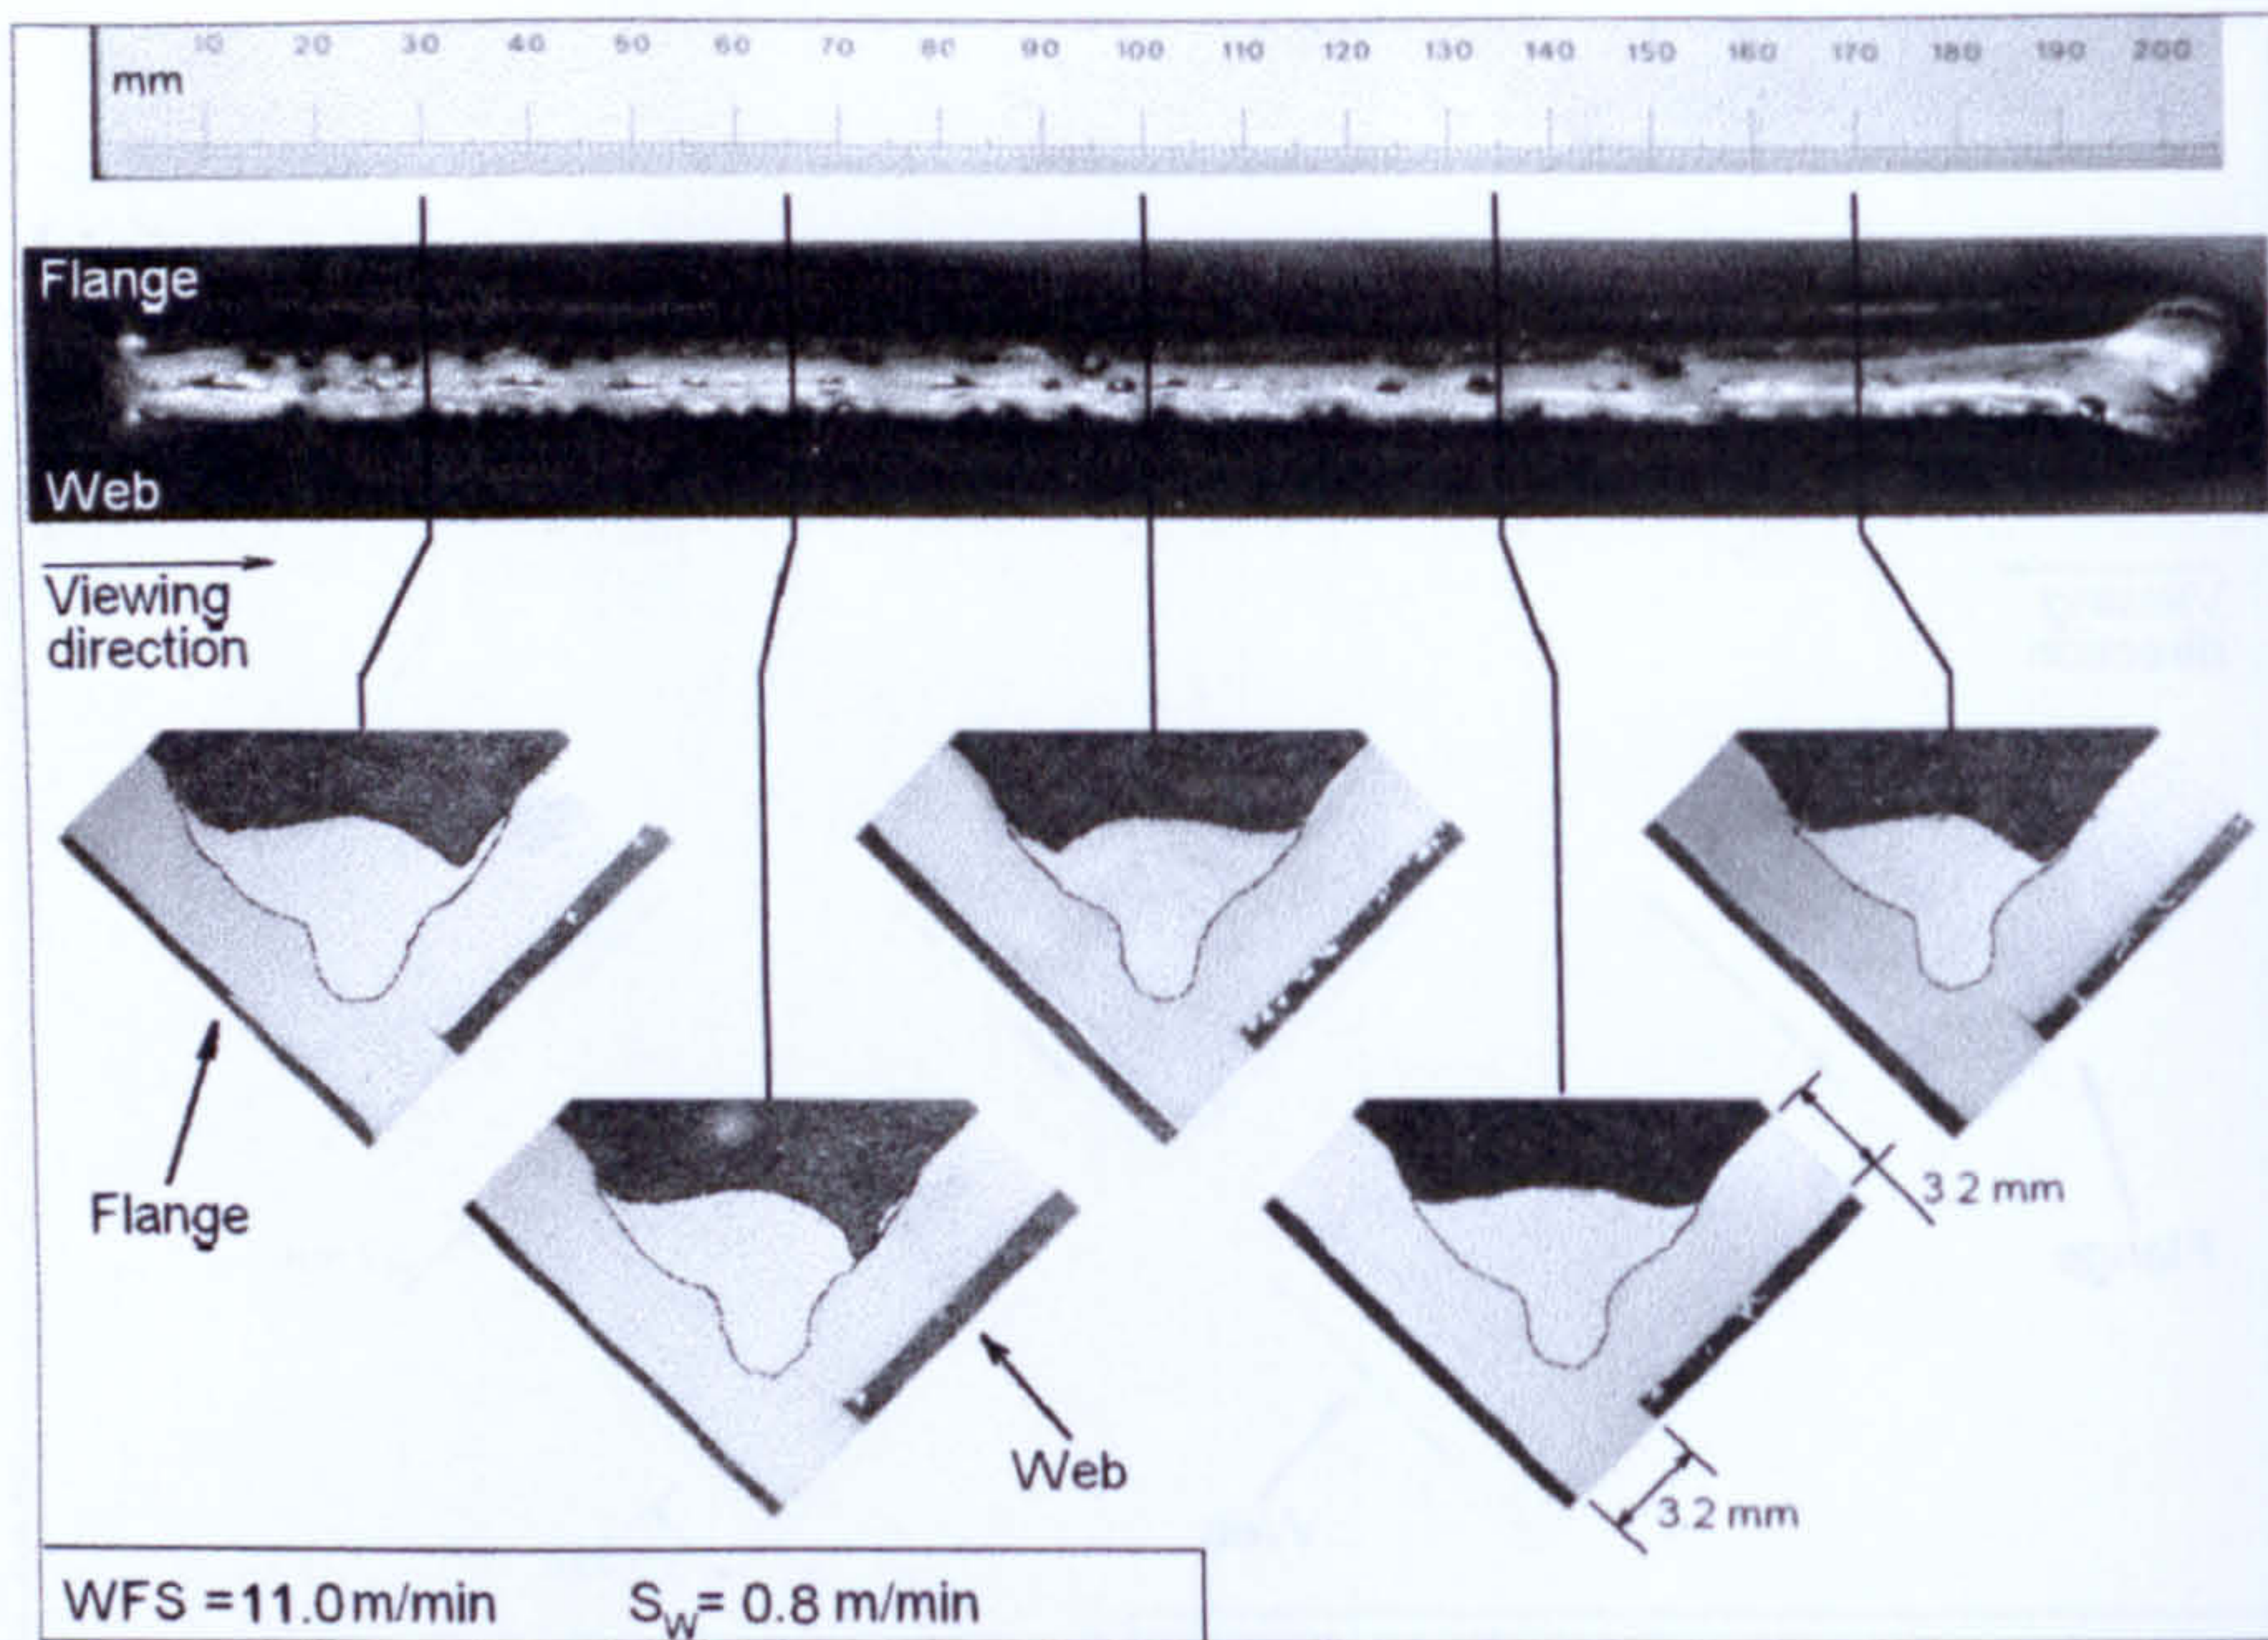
Welding data and bead geometry obtained from test M2
